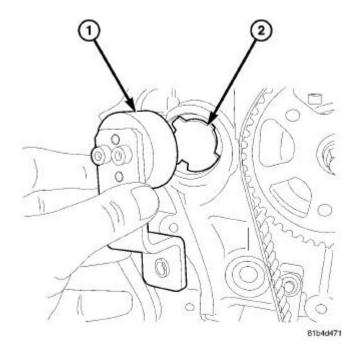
INSTALLING CAMSHAFT LOCK TOOL Courtesy of CHRYSLER LLC
